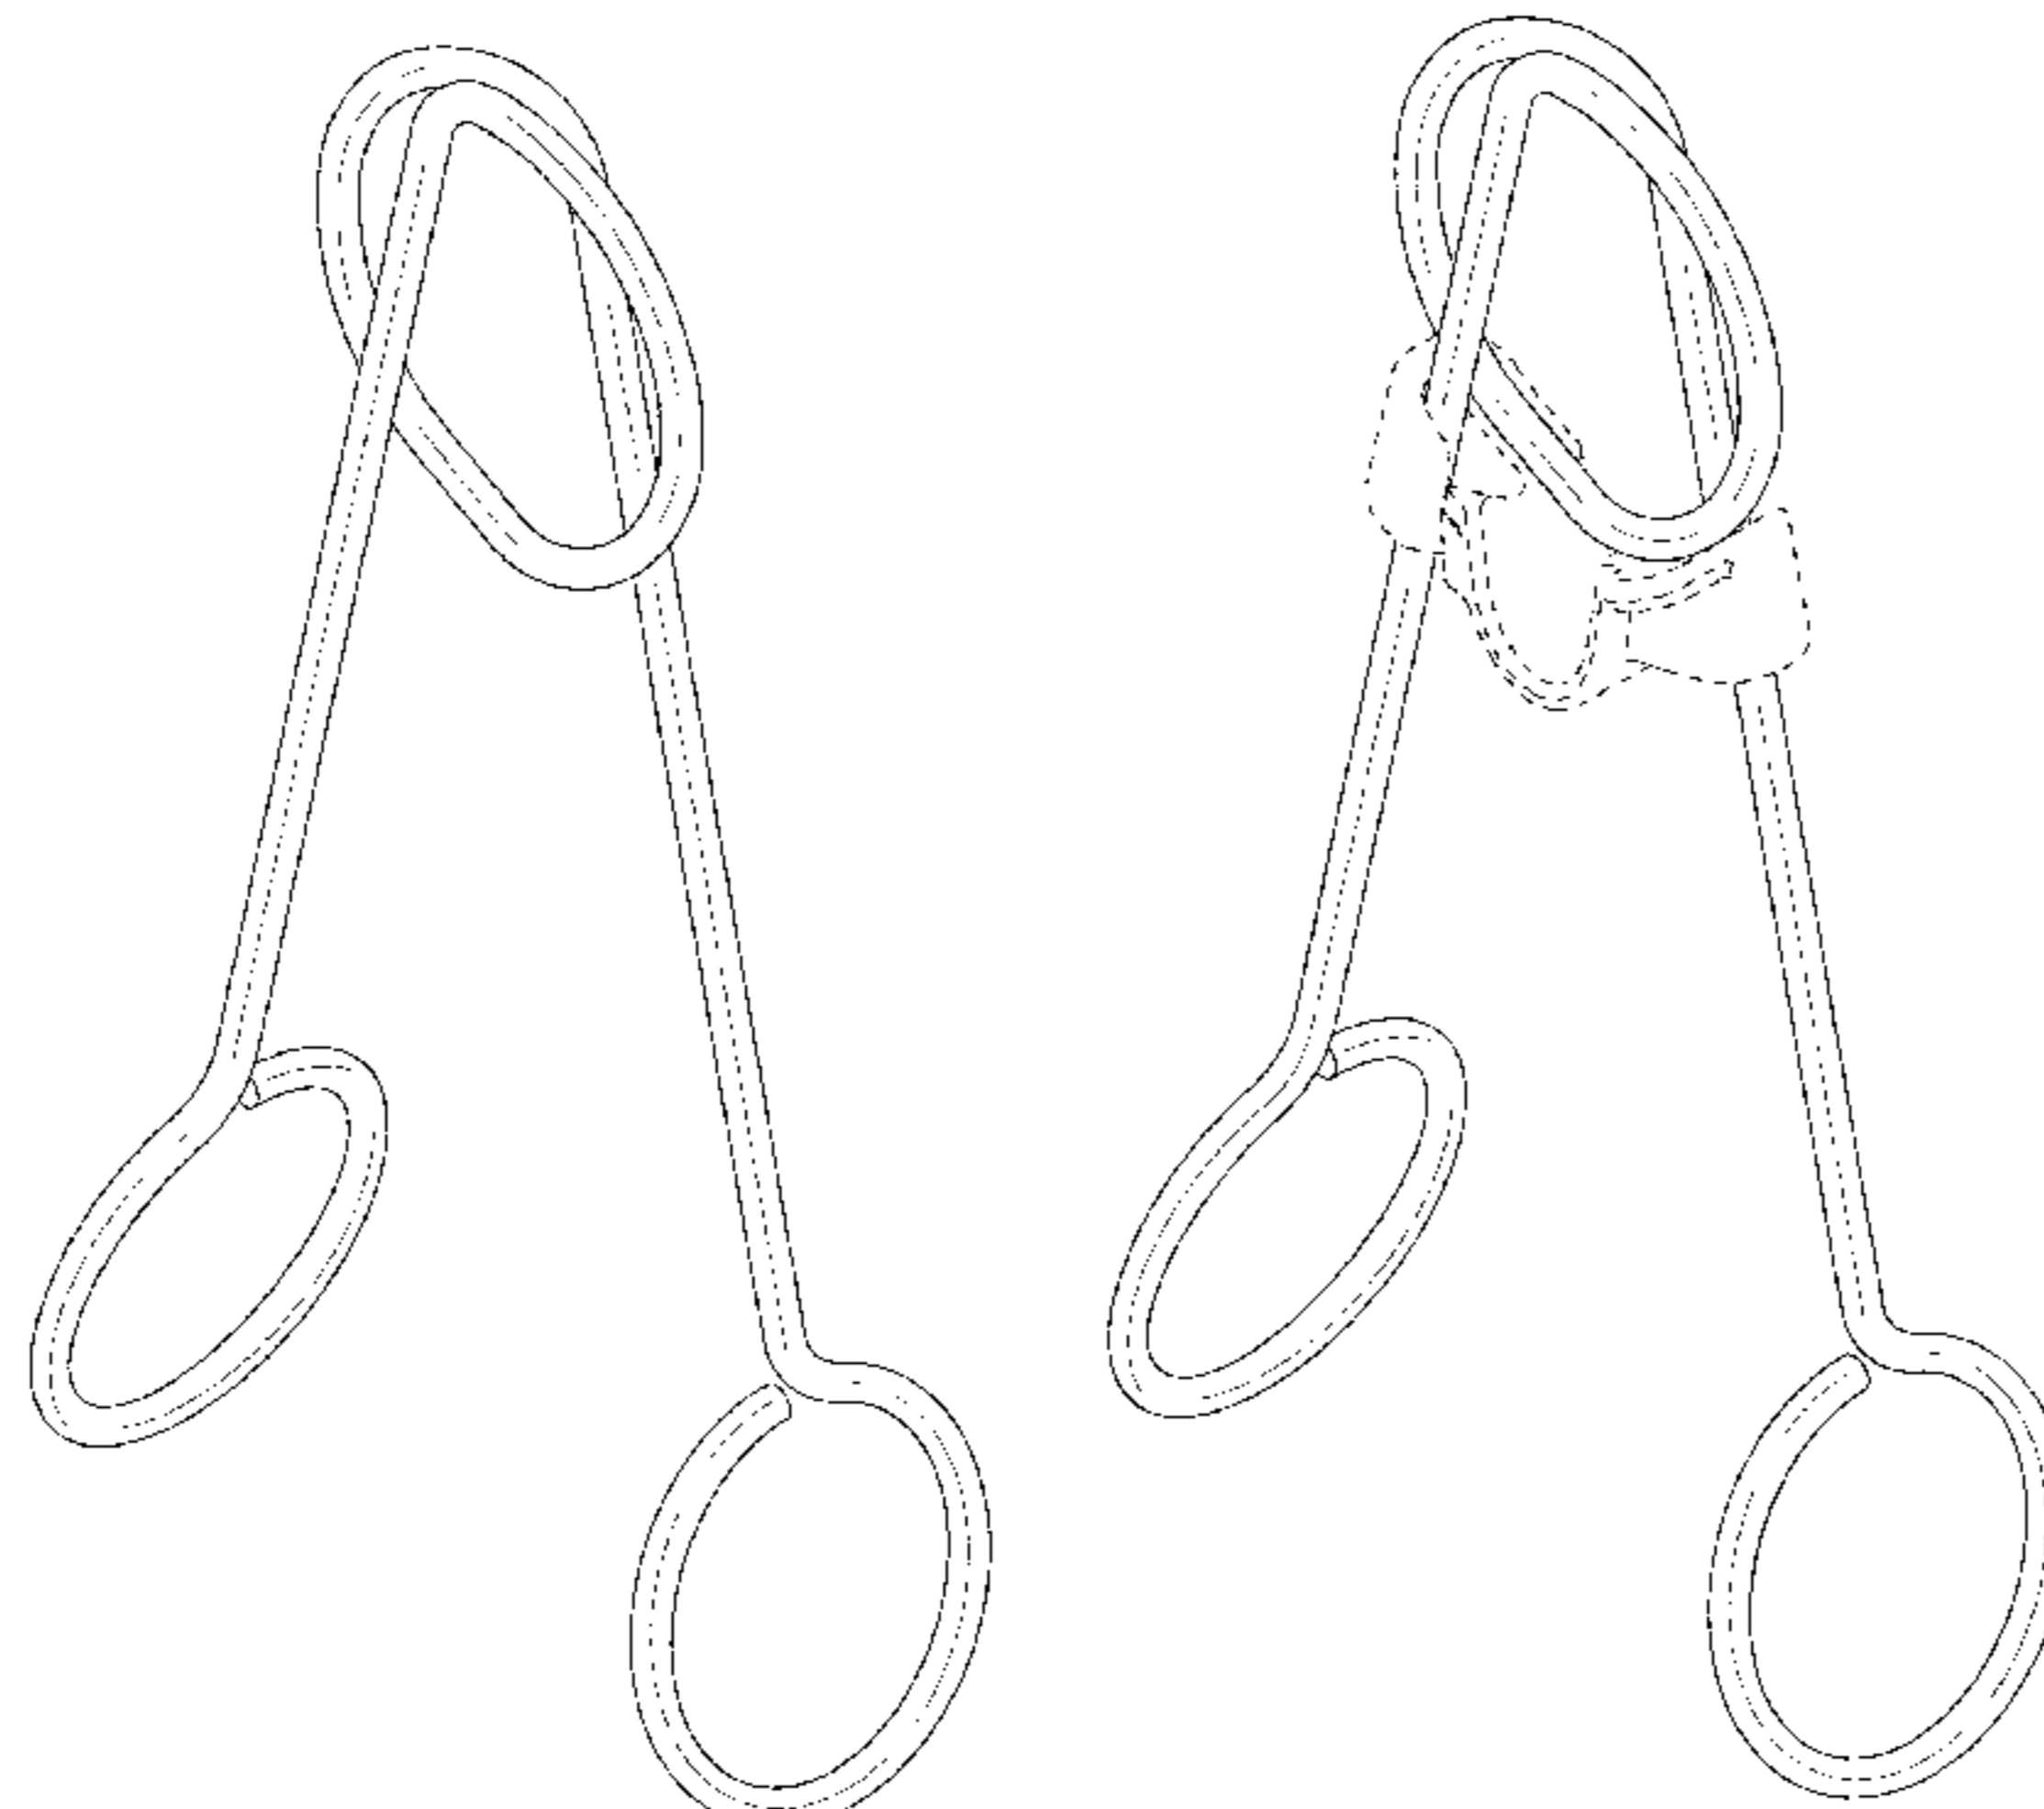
is a second side view of the design for the implant removal tool of FIG. 8;
